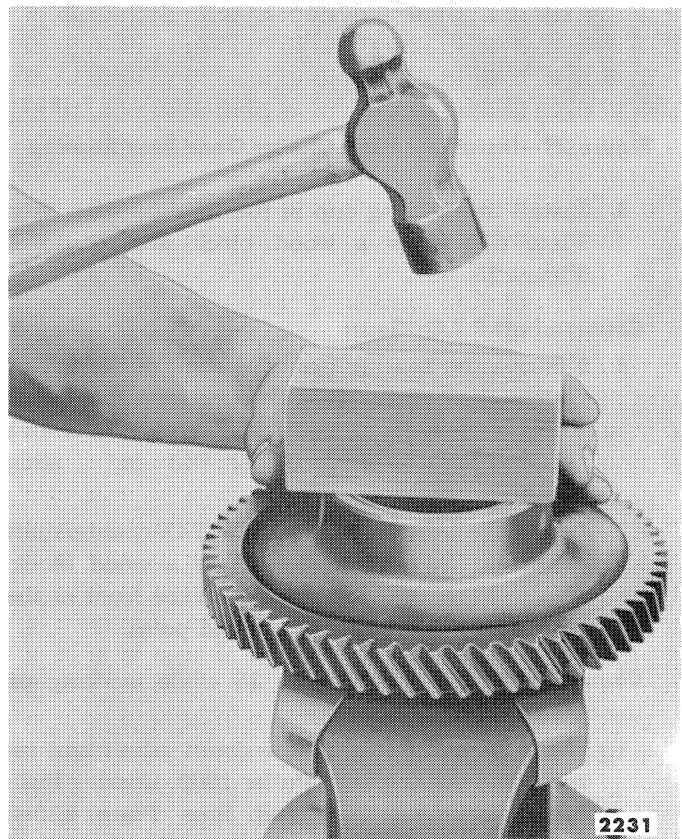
Installing Bearing Cup in P.T.O. Countershaft Gear
